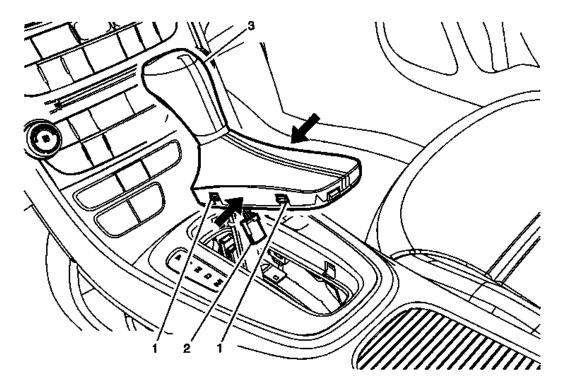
Identifying Manual Shift Detent Lever & Shaft Position Switch Assembly Courtesy of GENERAL MOTORS COMPANY
